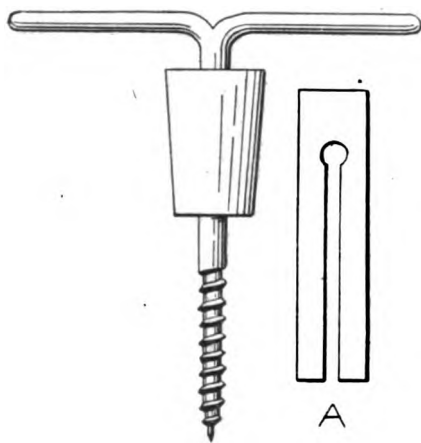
TOOL FOR REMOVING BROKEN SPOKES.
